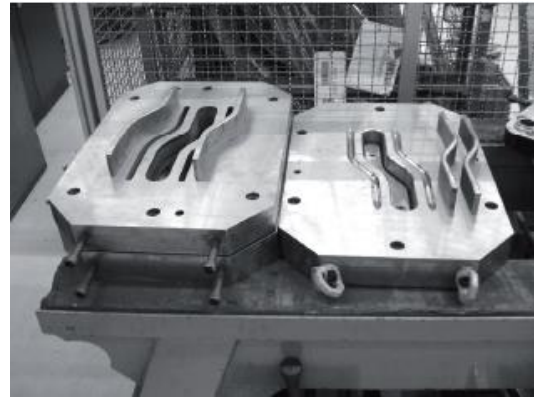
Numisheet 2008 BM 02 Stamping Tools: Blankholder, Drawbeads and Die [17].
